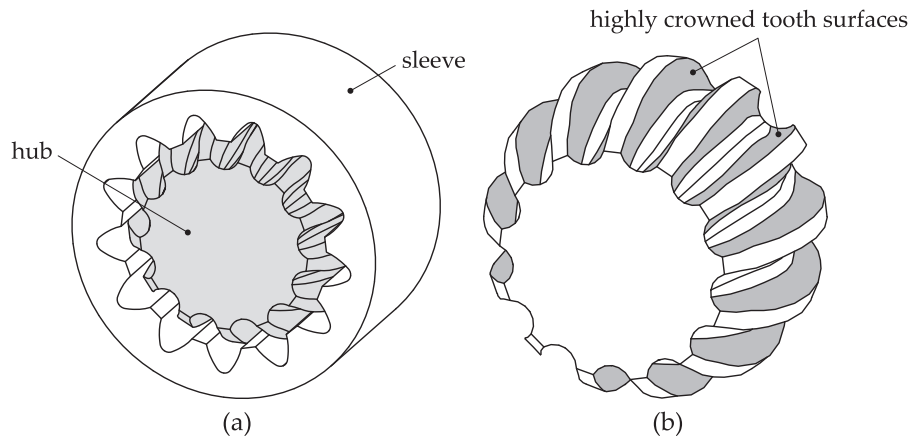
Spherical gear coupling: (a) assembly of hub and sleeve, and (b) hub with highly crowned tooth surfaces.
